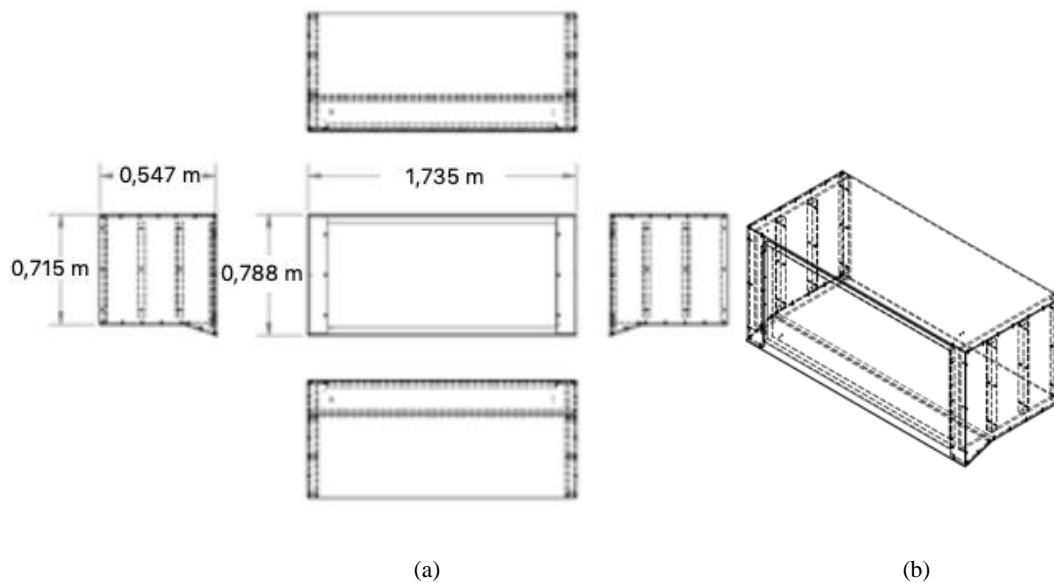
Metal frame of the prototypes – (a) dimensions in mm – and (b) ensemble frame.
